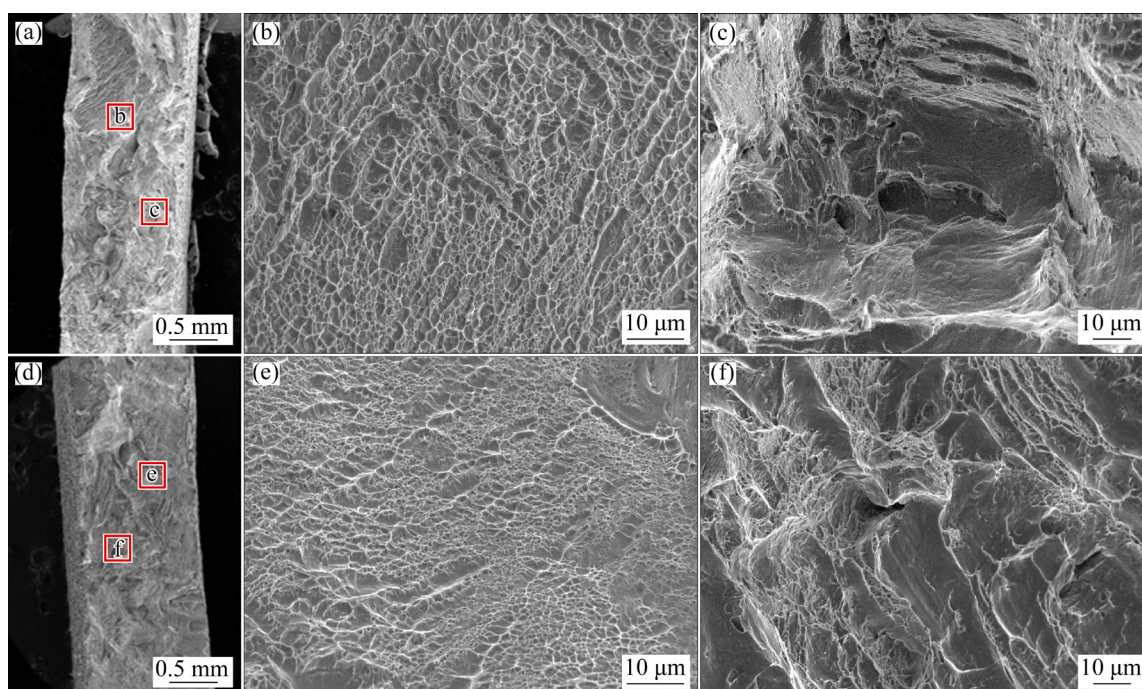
Fracture morphologies of as-welded (a–c) and PWHTed (d–f) joints
